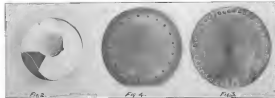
shows the method of preparing the damaged portion of a metal portion for repair. Fig. 3 shows the completed riveted patch. In Fig. 4 is shown the method of securing over a wing repair metal without riveting.
